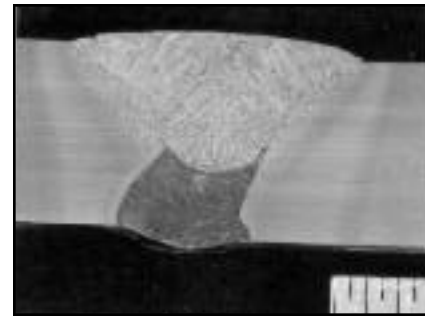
A cross section of a completed weld in which the root weld was affected by arc blow (RO = 6.4 mm; I = 900 A). Note incomplete fusion on the right side of the fill weld.
